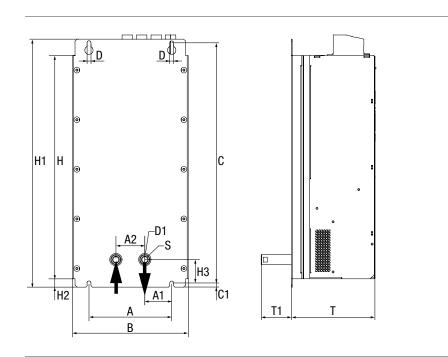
Dimensional drawing of housing with liquid cooling, schematic representation for BG3 to BG6a
